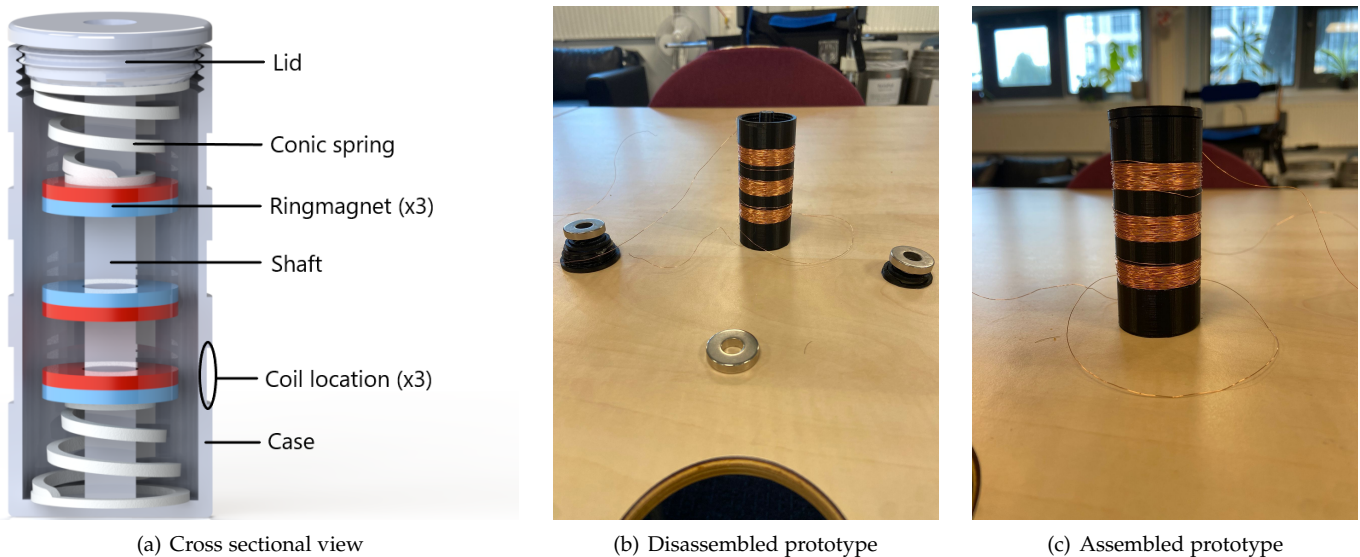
The levitated magnet - prototype design. The hydraulic piston shaft is replaced by a 3D printed axis. This prevents the magnets to flip inside the housing. The springs are replaced by 3D printed conic springs. Copper wire is wound around the housing to form 3 coils. Each coil contains 100 windings. The images from left to right show a cross sectional view of the design (a), a disassembled view (b) and an assembled view (c).
